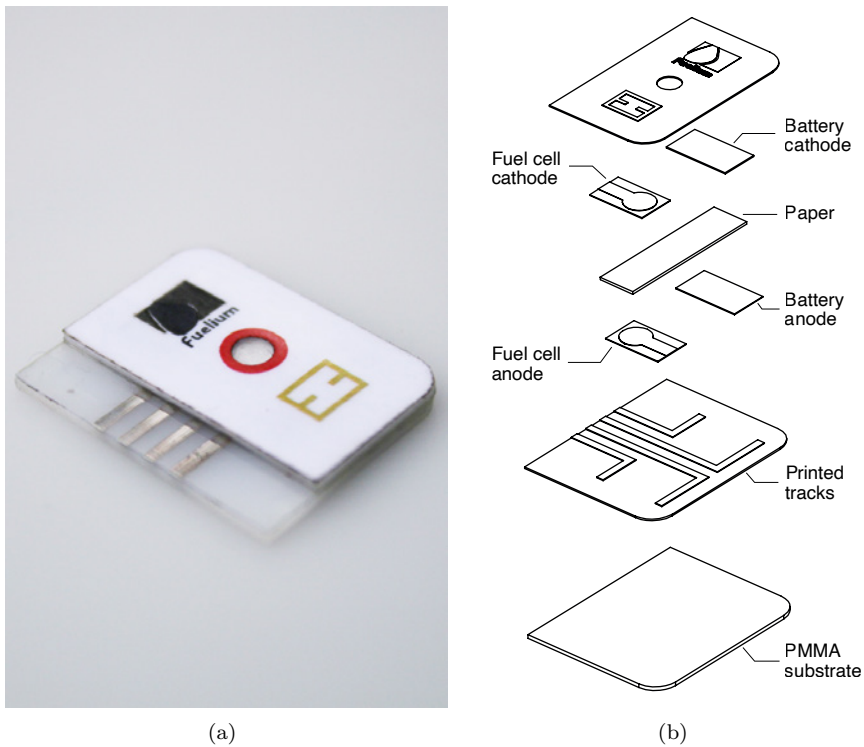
(a) Picture and (b) exploded view of paper based test strip and its main components.
